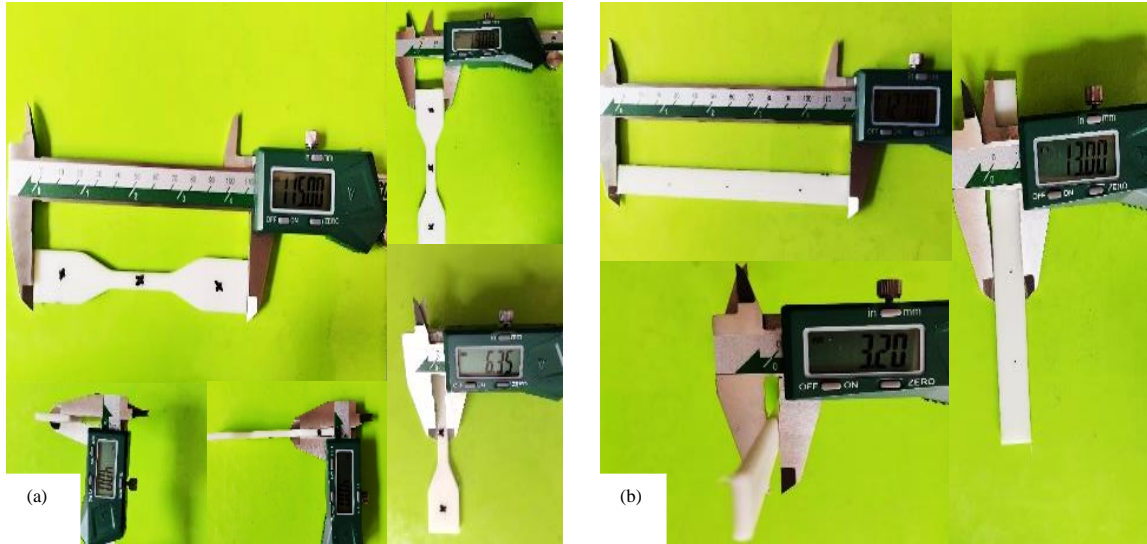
Shrinkage measurement (a) ASTM D638-IV, and (b) ASTM D790
